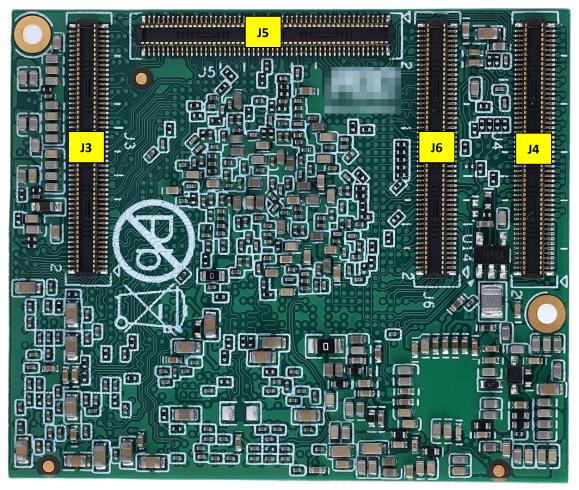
shows the bottom-side view of the SSOM-RK3588-X2 board
